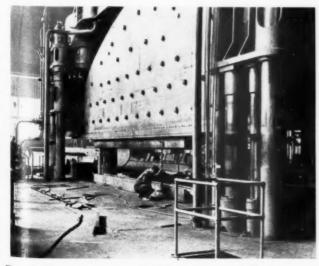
Press operator checking dies of 6000-ton press, Controls are at far end of press at extreme left
